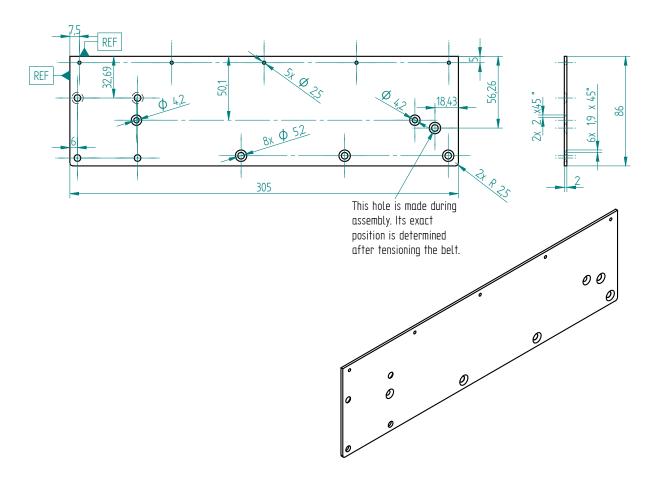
Drawing of the  $\mathbf{sheet}$  part
